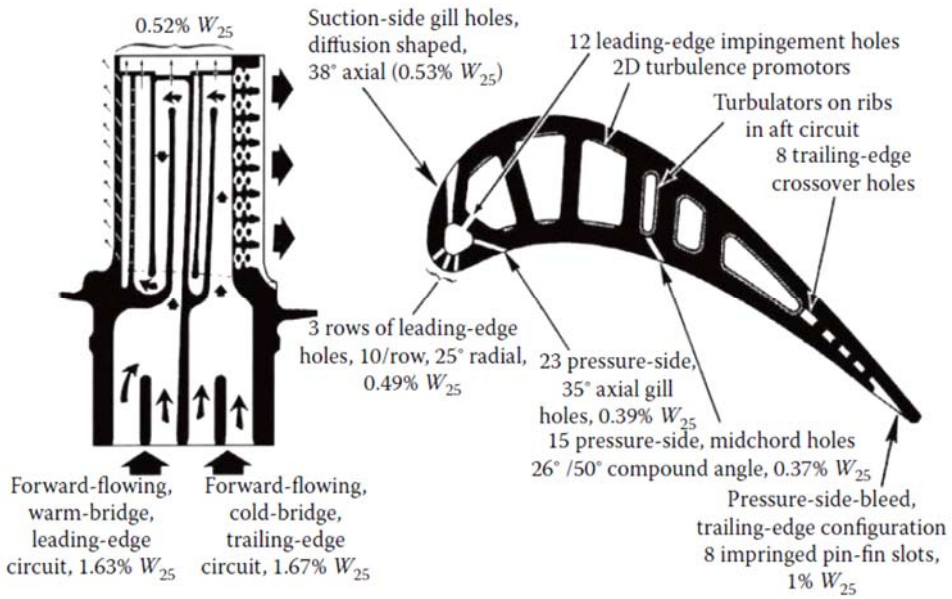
First stage high pressure turbine rotor blade cooling system- [9].
